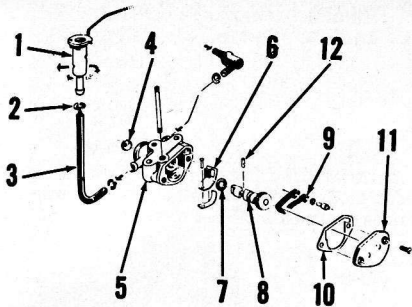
Exploded view of chain oil pump used on models R12, R14, R16, R17 and PT15. Refer to Fig. PT15 for operation of pump.
